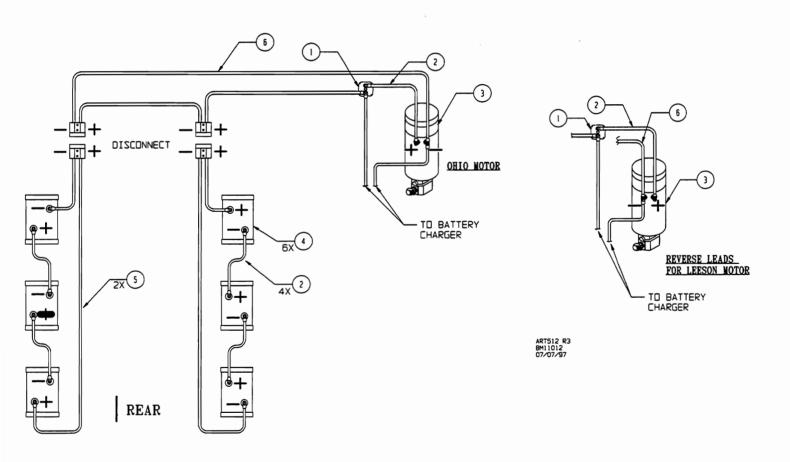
Standard Series Battery & Motor Cable Layout
